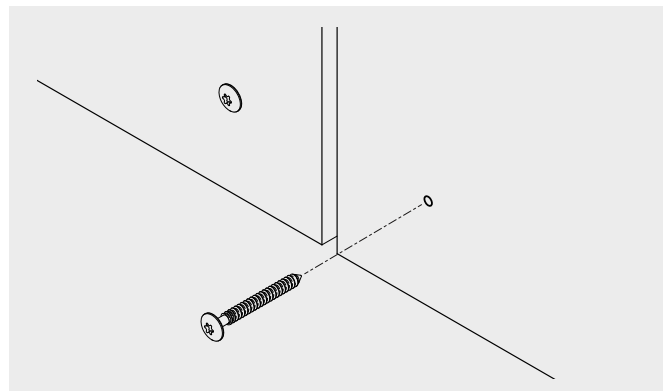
| Exposed Direct Fastener | Through Panel Face
